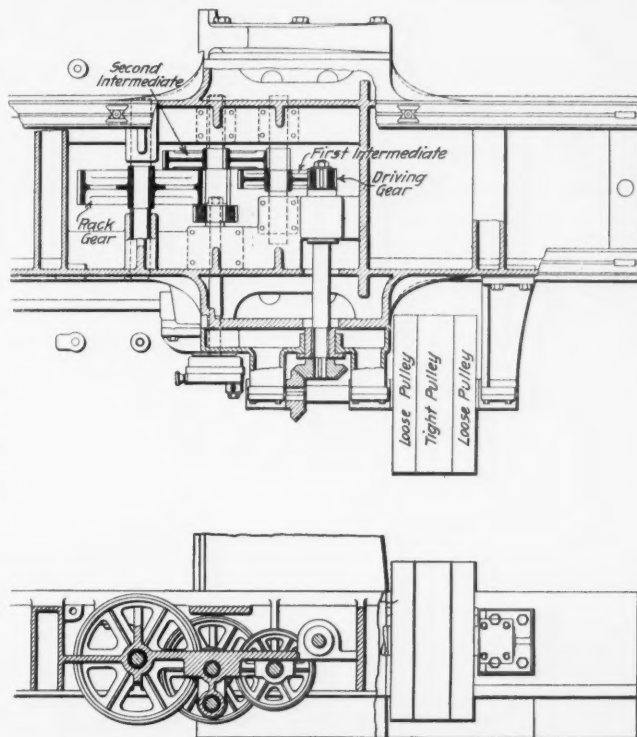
Arrangement of Driving Gears in Rod Planer.
